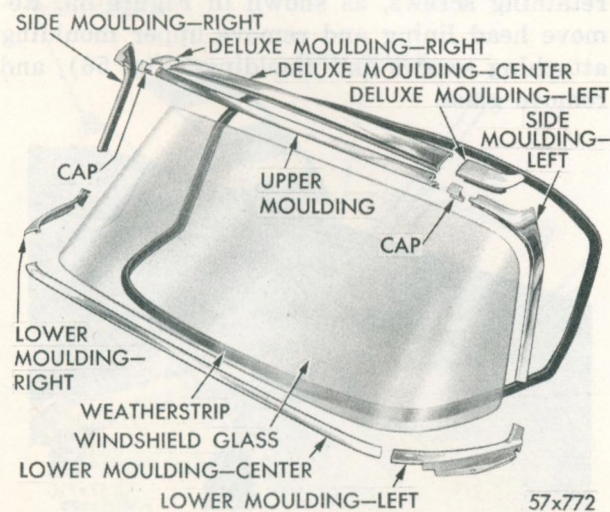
Windshield and Moulding Assembly (C-75, C-76)
